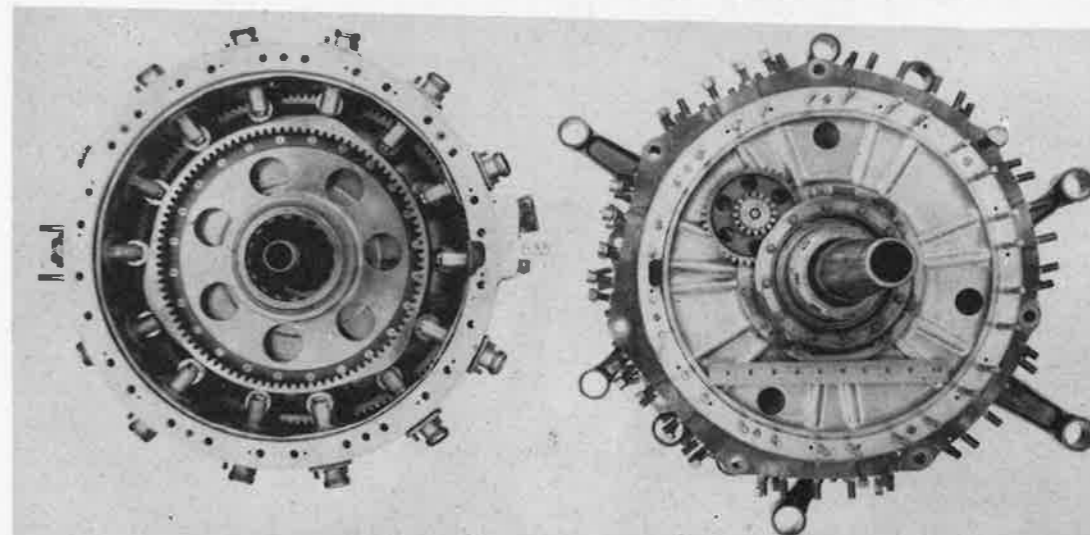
Front Cam, Push Rod Rollers, and Power Section of Sakae-21 Aircraft Engine. (CEE-2963). 29035
